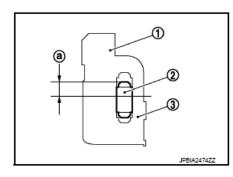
Locating Actuator Bracket, VVEL Ladder Assembly And Dowel Pins Courtesy of NISSAN NORTH AMERICA, INC.
